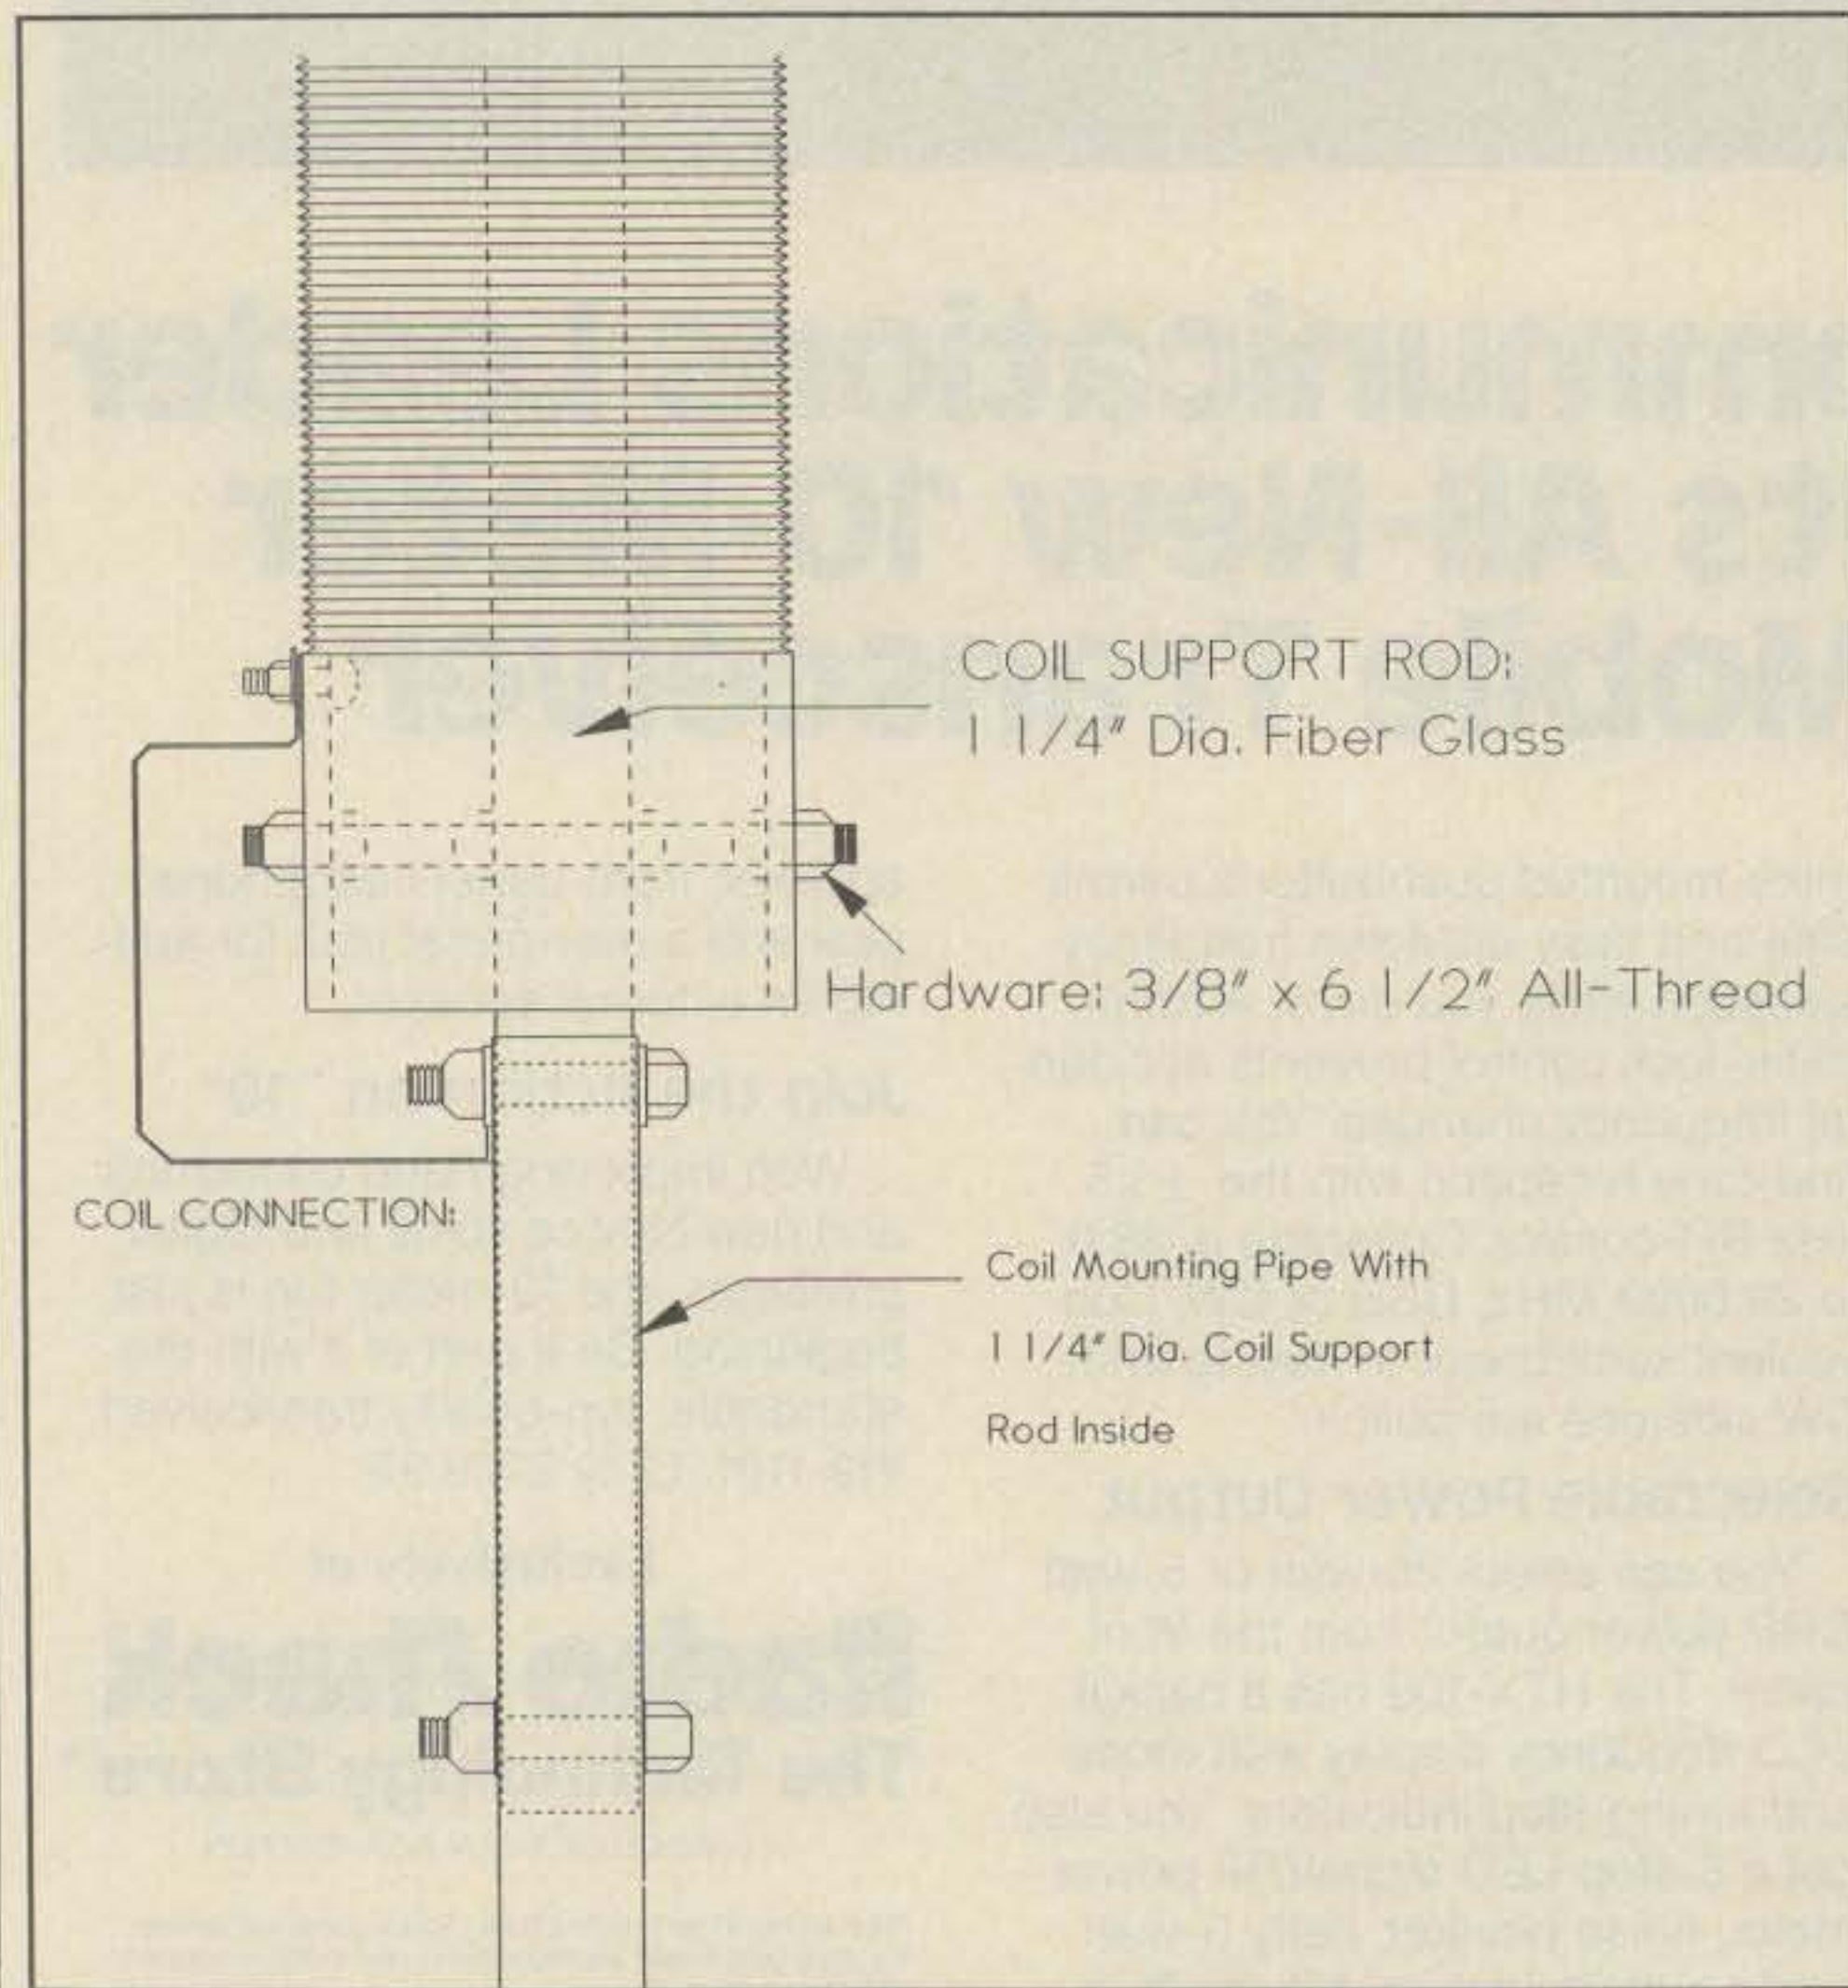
Assembly diagram for connecting the top section of the antenna to the 36 foot telescoping mast.
